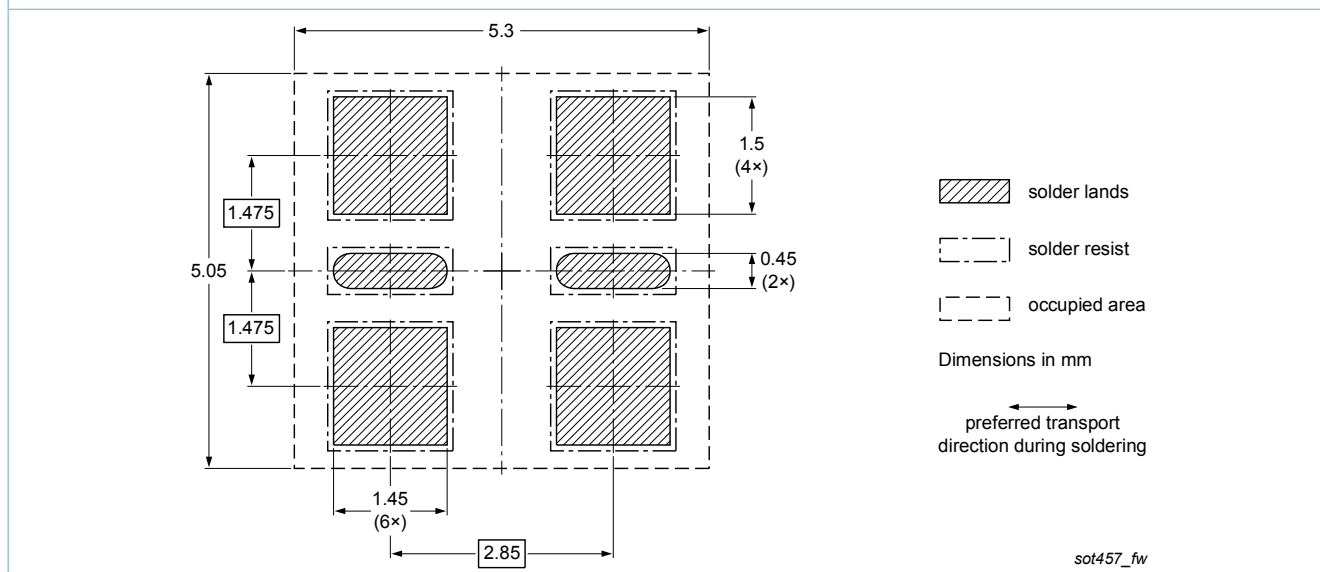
Wave soldering footprint for TSOP6 (SOT457)
